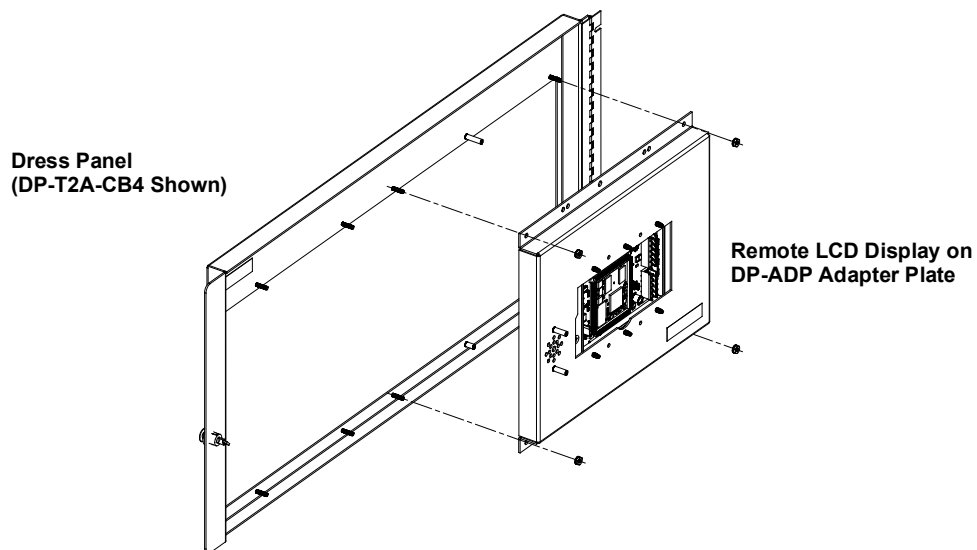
Mount Remote LCD Display in DP-ADP in Dress Panel of the CAB-4 Series Enclosure (DP-T2A-CB4 Shown)
